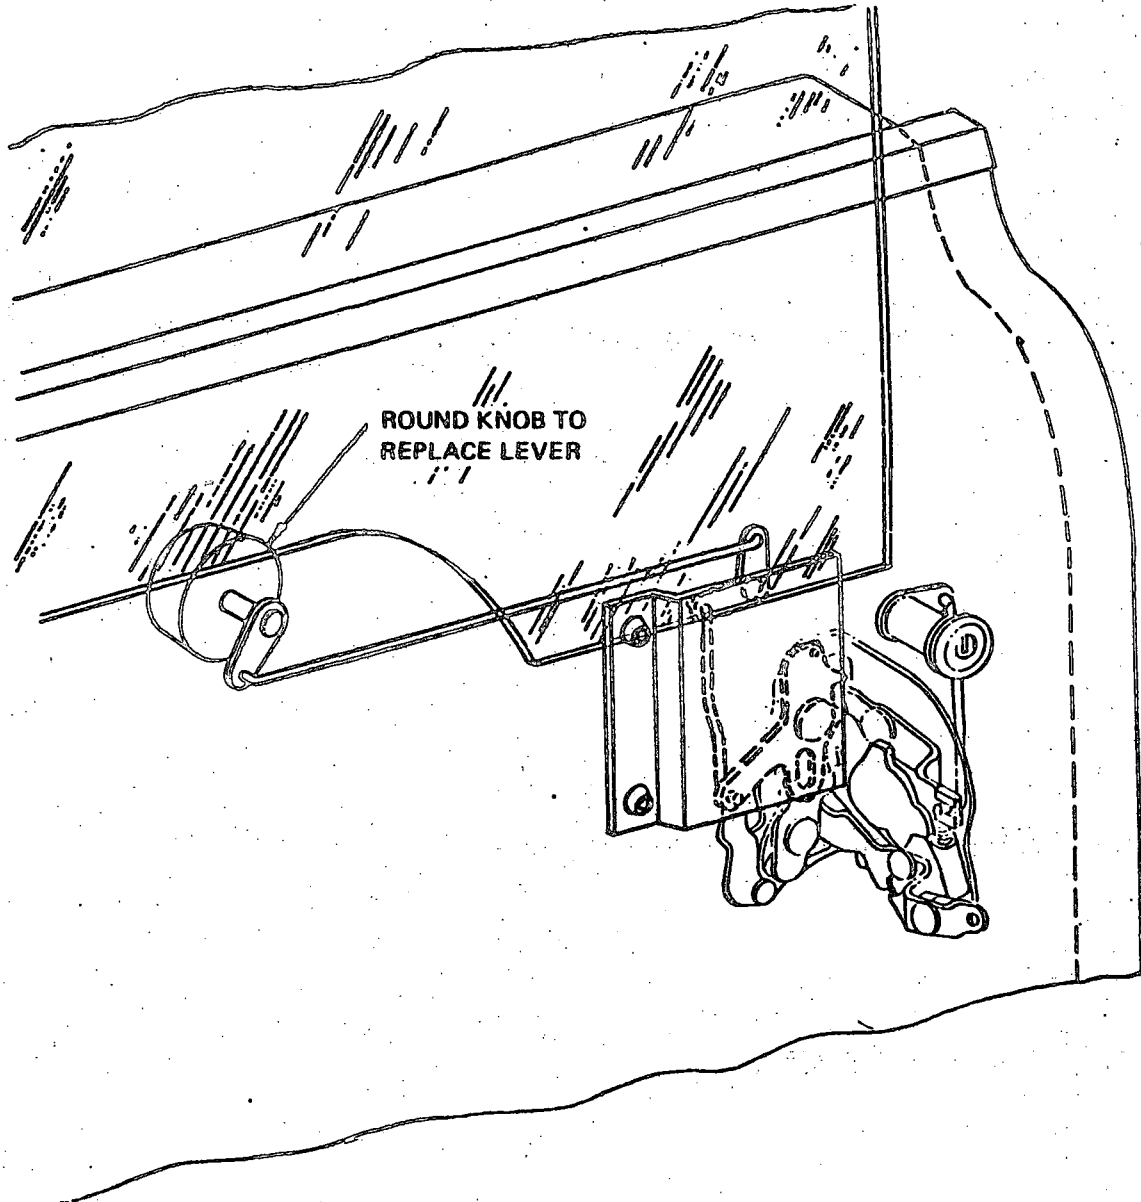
DOOR LOCK SYSTEM – BARRIER MOUNTED ON OUTSIDE OF GLASS.
